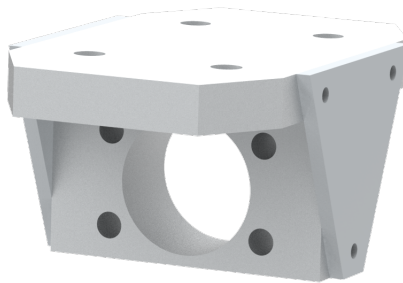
Fastener to connect the ball screw to the upper and middle plate.
